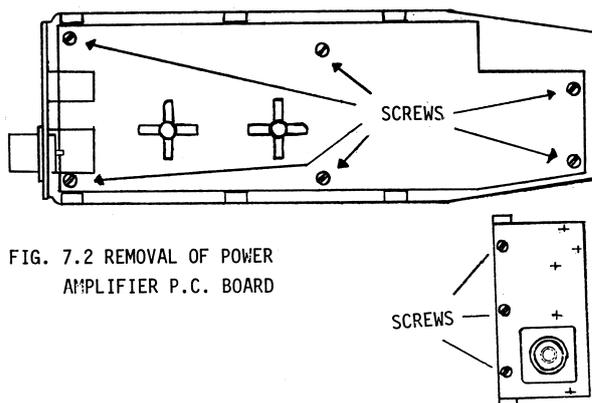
REMOVAL OF POWER AMPLIFIER P.C. BOARD
